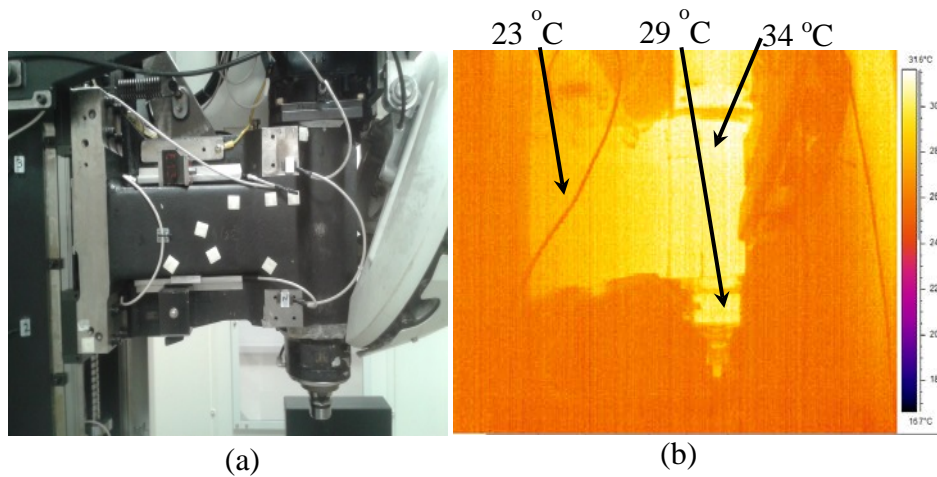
(a) Headslide of machine tool, (b) Its thermal image
